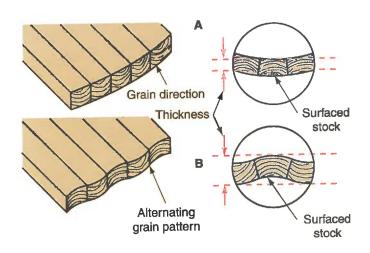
A—Edge-gluing workpieces without alternating grain pattern results in more warp and less surfaced thickness. B—Properly positioned workpieces results in less warp and greater surfaced thickness.
